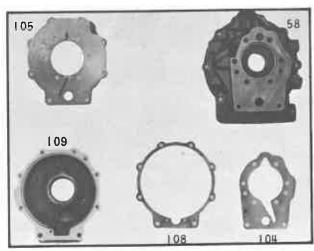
A 2.57 & 2.91 Reduction Parts Used with Latest Oil Circulation System
